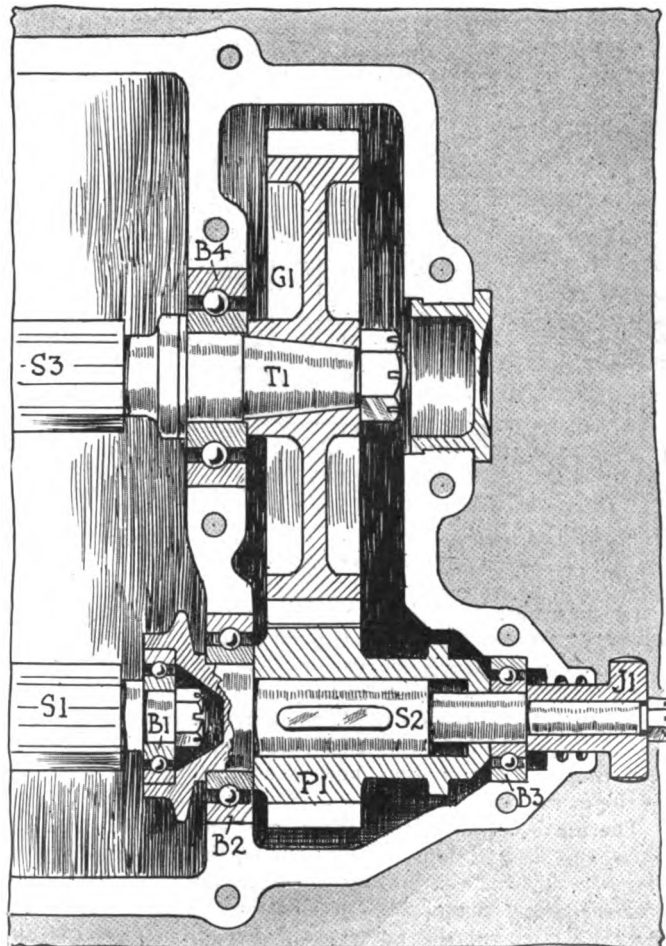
Part section of Delahaye transmission gear, showing how the shafts rotate, details of design and fitting of relating members
